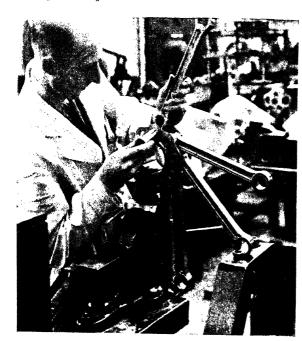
(left).—Assembling articulated rods and wrist pins to master rod.
